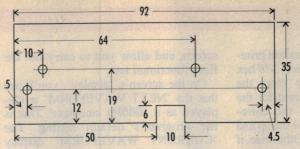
(left): the cutting and drilling information the transformer mounting plate. All holes are 3mm in diameter. The notch is to clear the case assembly pillar.
